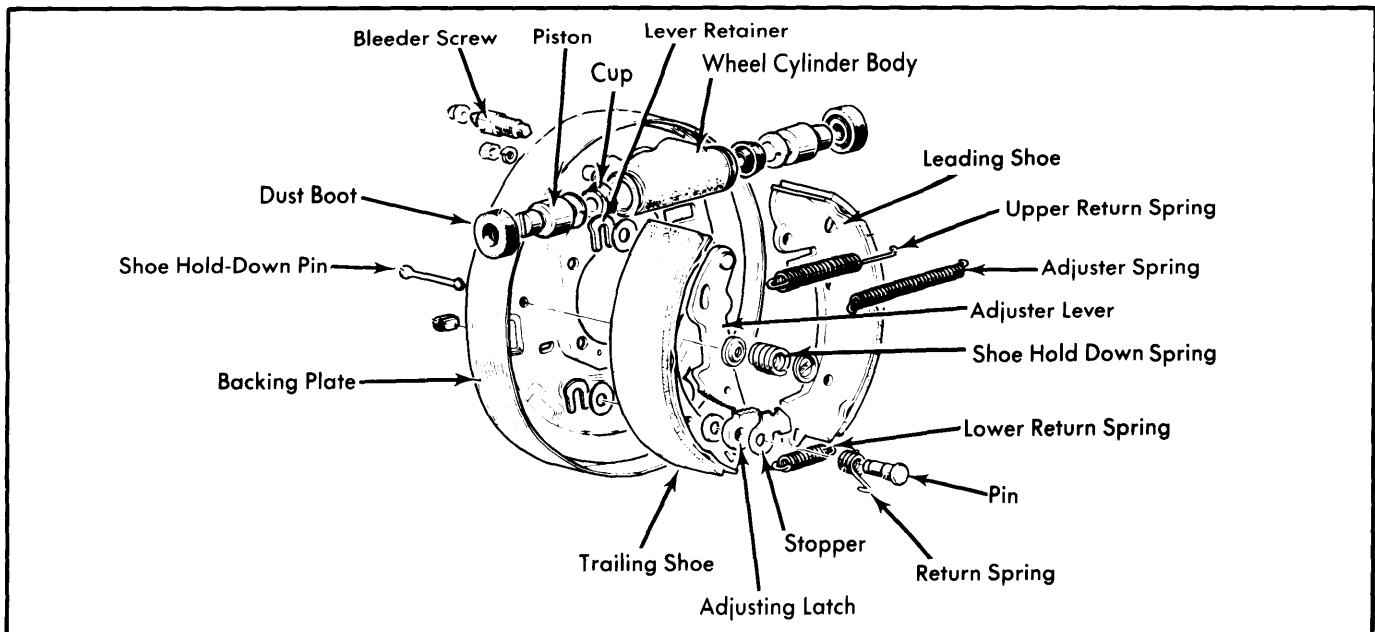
Exploded View of Rear Brake Assembly for Component Relationship (Arrow, Challenger, Sapporo & Colt Sta. Wgn.)
